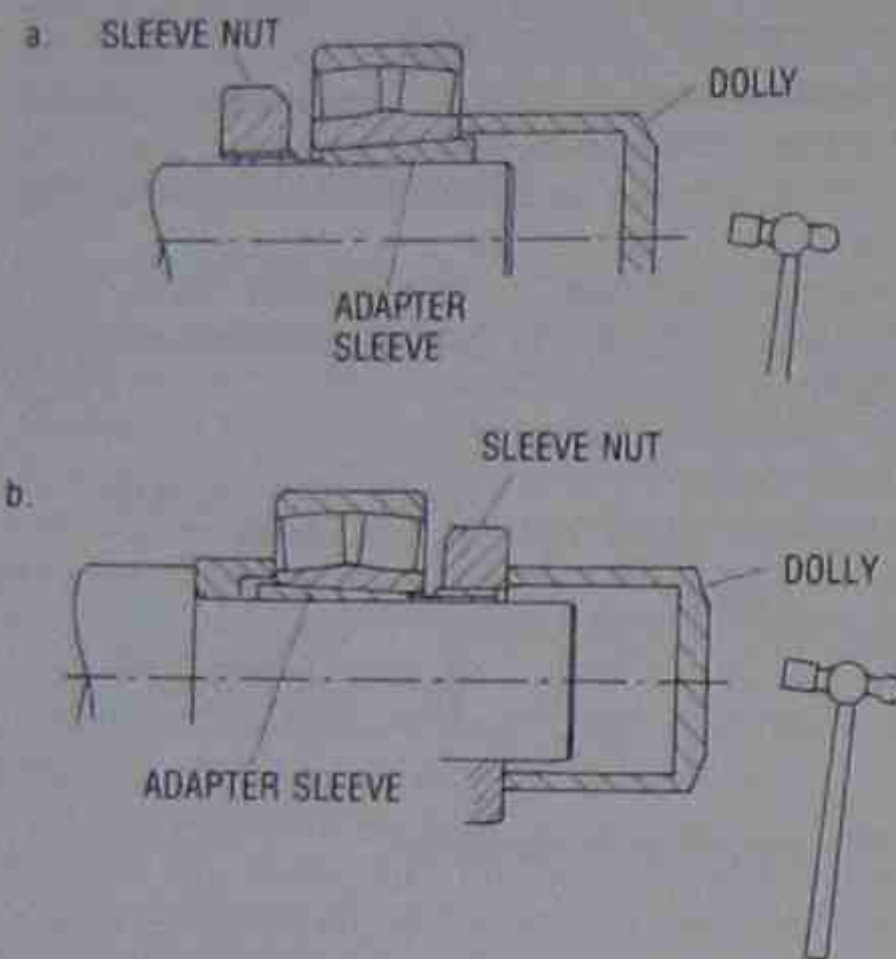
Using a hammer and dolly to dismount a bearing from an adapter sleeve.
